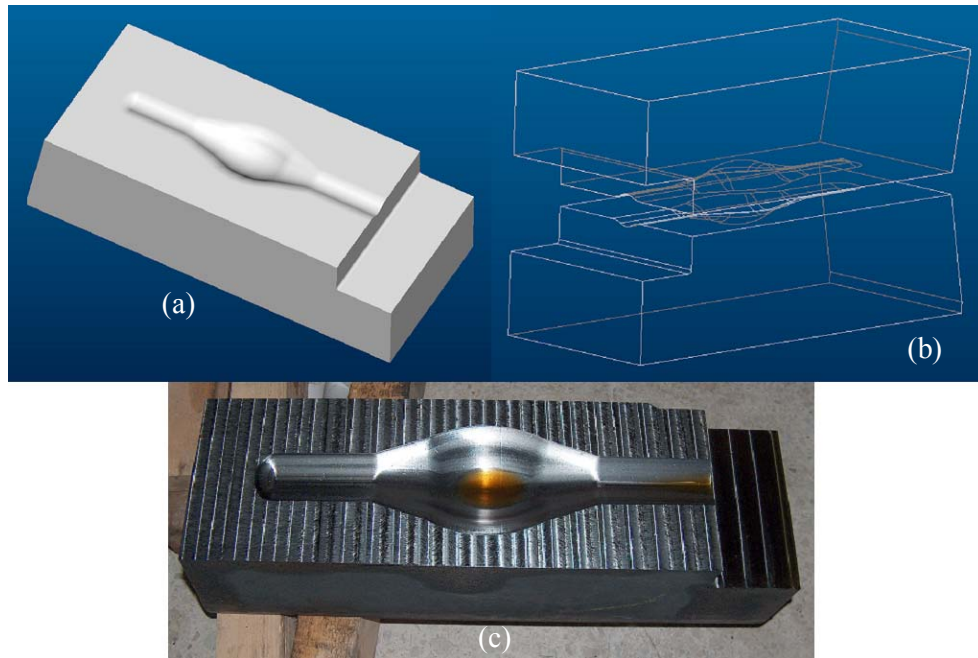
(a) Created Model of the 2<sup>nd</sup> Preform (Fullering) Operation Die; (b) Assembly Model of the Dies; (c) One of the Manufactured Die
